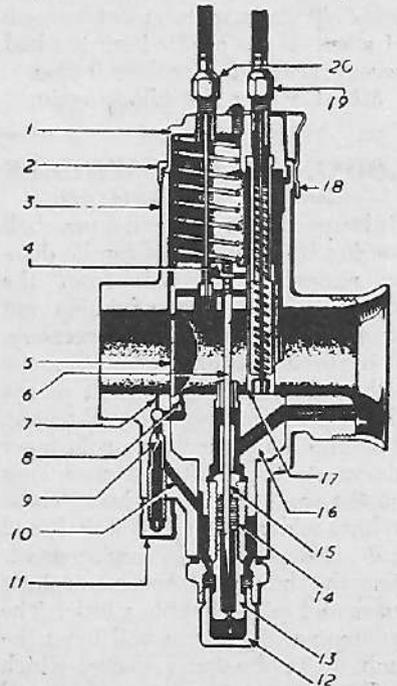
Section through mixing chamber, showing air valve and throttle closed.
